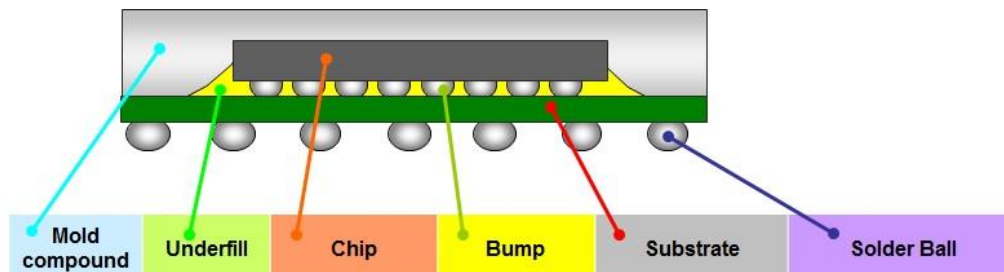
Flip-Chip package (UF + Mold) Diagram
